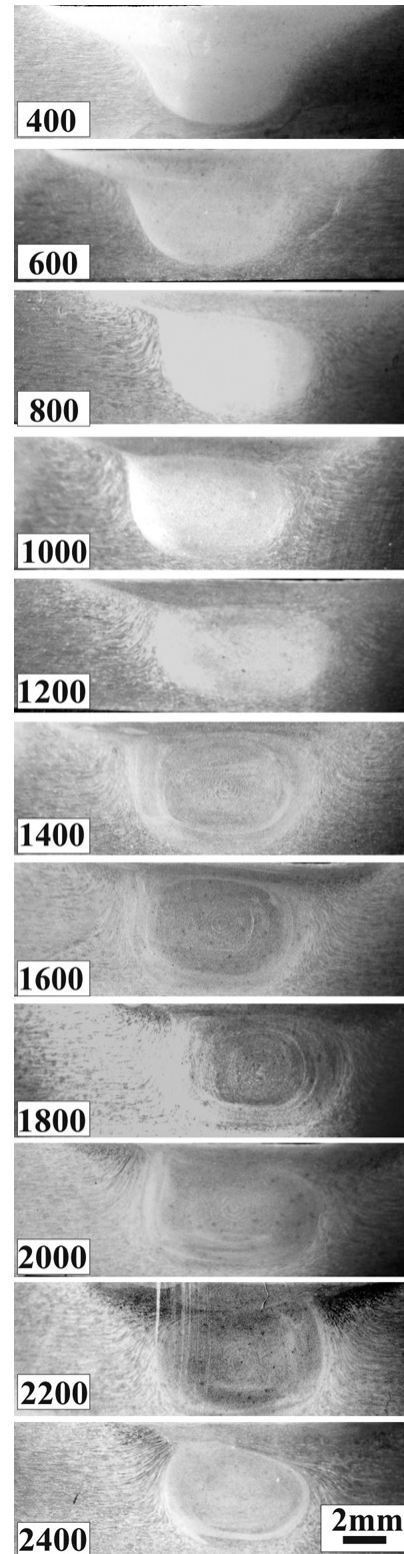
and 9, respectively represent the top surface image (crown surface) and cross-section of the weld zone, obtained at different tool rotational speeds with a fixed welding speed of 50 mm/min. The tool rotational speeds ranged from 400 rpm to 2400 rpm. All the joints are free from defects like pin holes, tunnels, cracks etc. This shows that the consolidation of weld metal is uniform and good in friction-stir processing (FSP) region for all joints. Even though the FSP zone is free from defects, its shape and dimensions are different in each case. Top surface of the weld with rotational speed 1400 rpm to 2400 rpm shows rough surface as compared to weld with low rpm. Reduction in flow strength of weld metal at high temperature, due to high rotational speed can be attributed to the formation of rough surface. This configuration (conical pin with thread) of the tool may be promoting a higher level of hydrostatic stress along the joint causing a better consolidation of the plasticised material. The higher level of plasticisation
